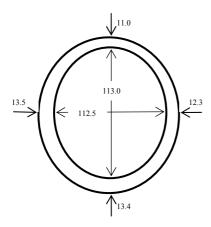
Typical measured tube dimensions (mm) of a failed tube
